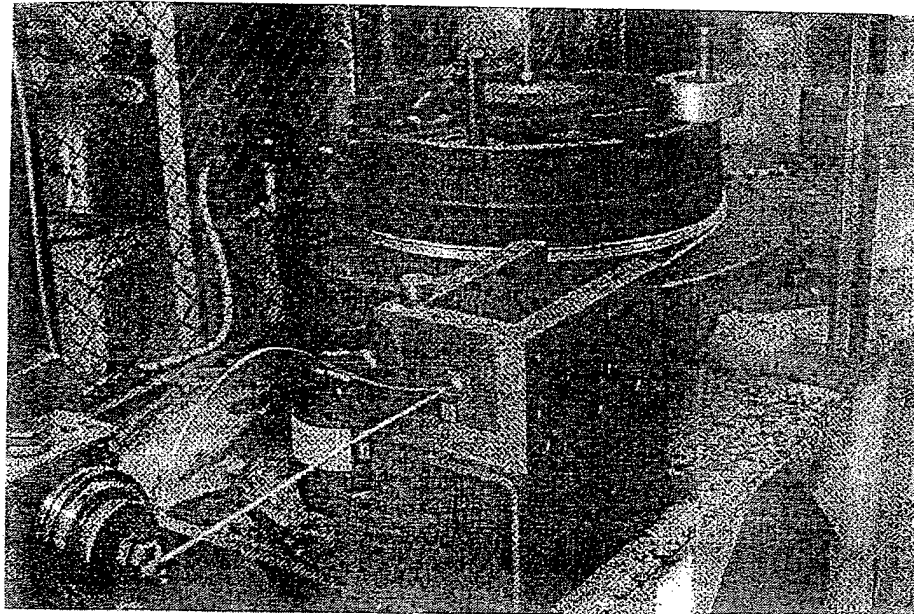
Photograph showing the wire drawing box, capstand, and the last stage in the wire forming process.
